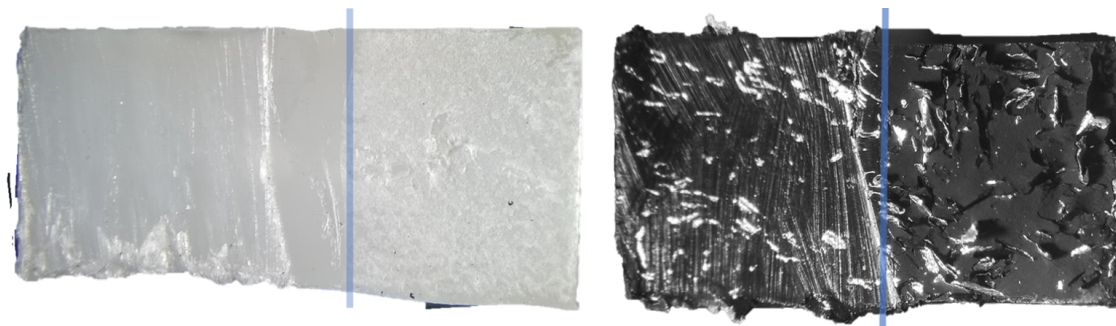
Fracture surfaces of three point bend test specimens. For each specimen, the precut area is to the left of the blue line and the fractured area is to the right. (Left) Neat (Right) Doped
